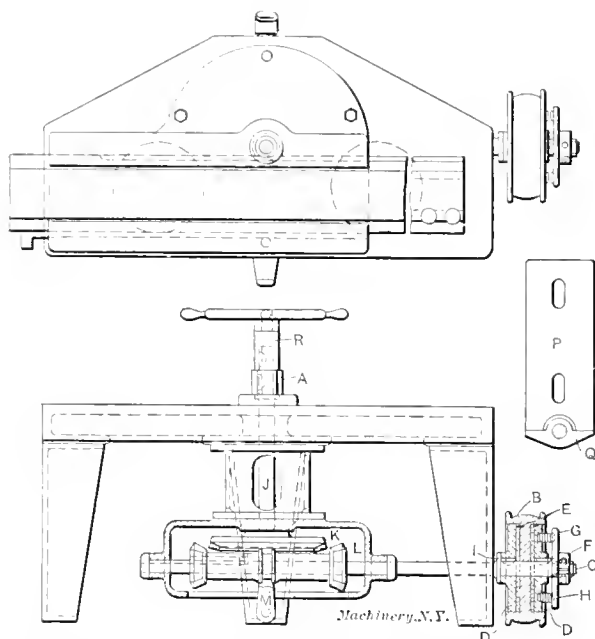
Machine for Imparting Motion to Boring Mill Rams while Scraping.
